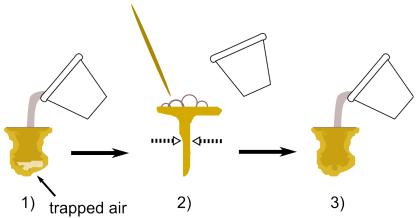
Air bubbles can get trapped in glove moulds- it is possible to squeeze them out and pop them with a toothpick if you are careful
